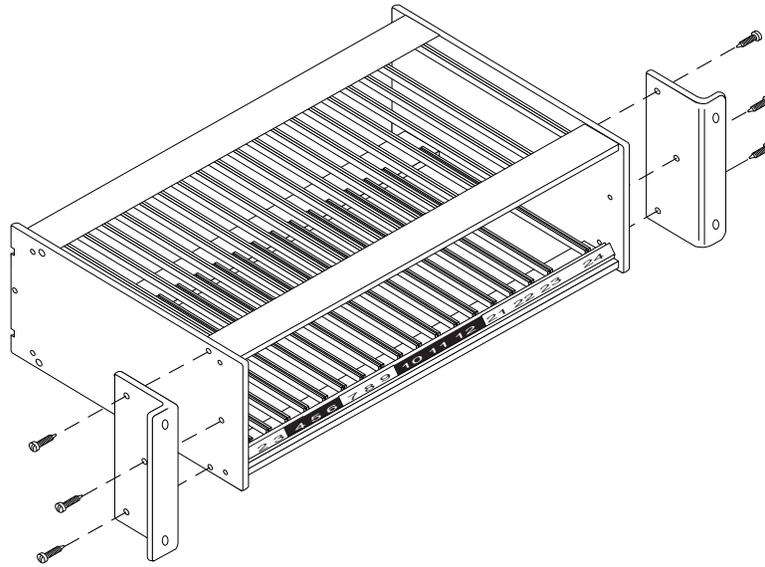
AC 120 Chassis with Front-Position Mounted Brackets
